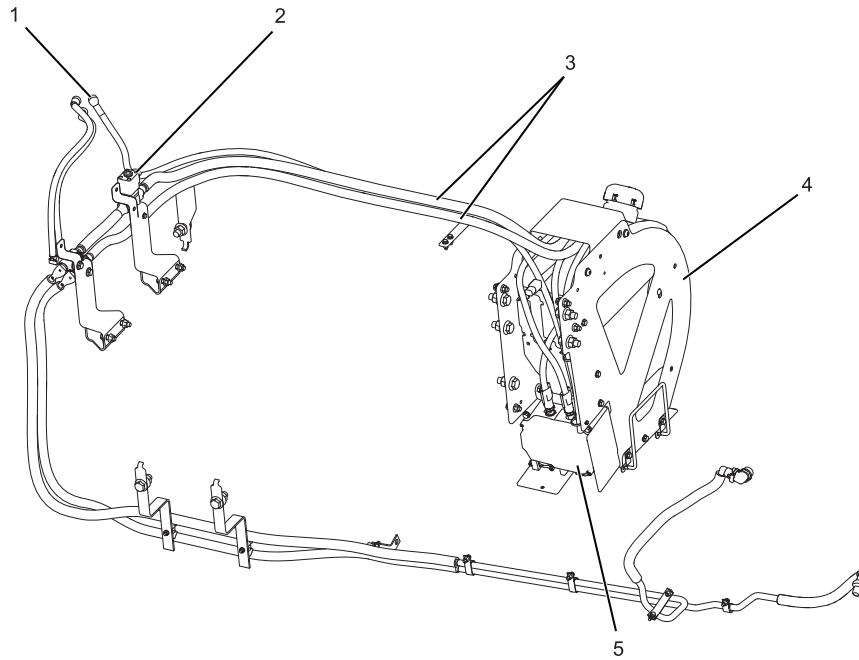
Diesel Exhaust Fluid (DEF) Tank Wiring Harness.
